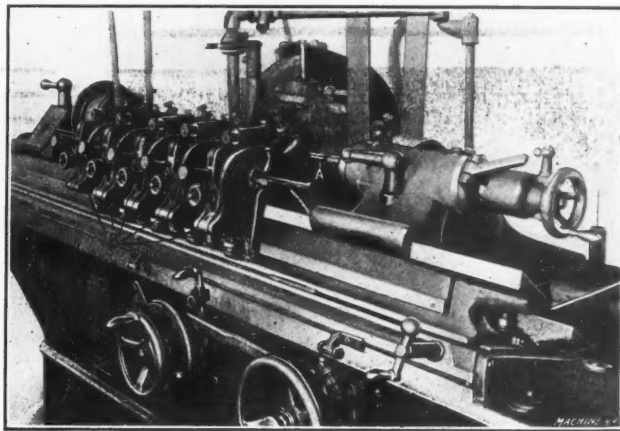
Finish-grinding Taper on Barrels in a B. & S. Plain Grinding Machine
